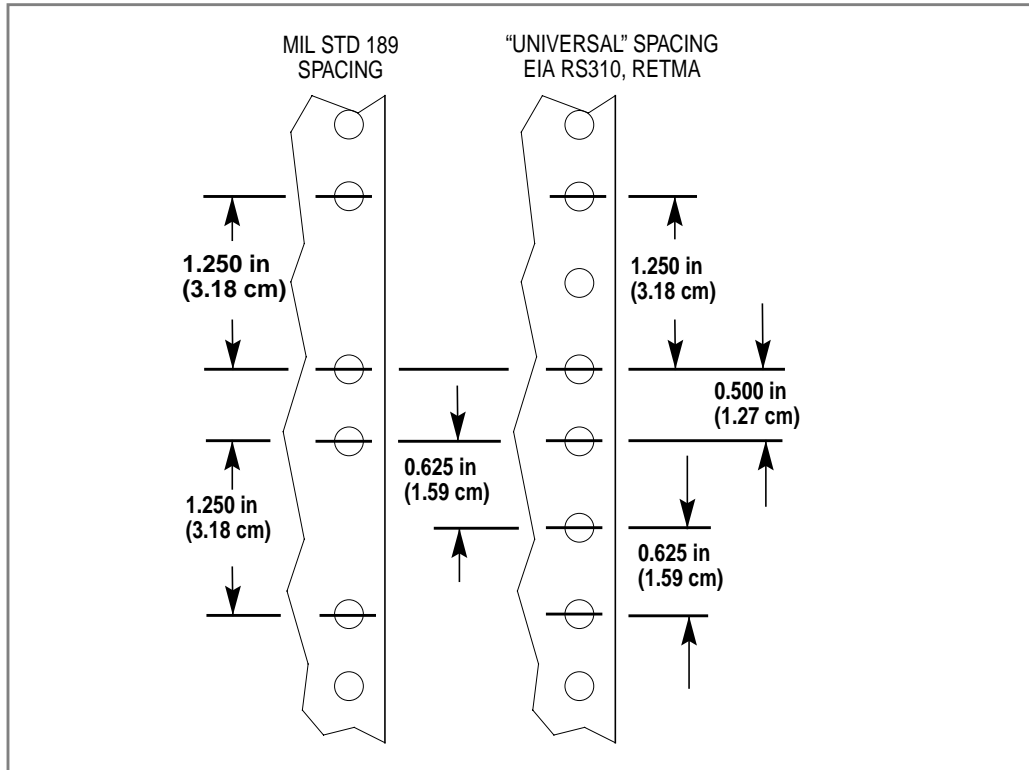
Spacing for Mounting Holes in a Standard Rack
